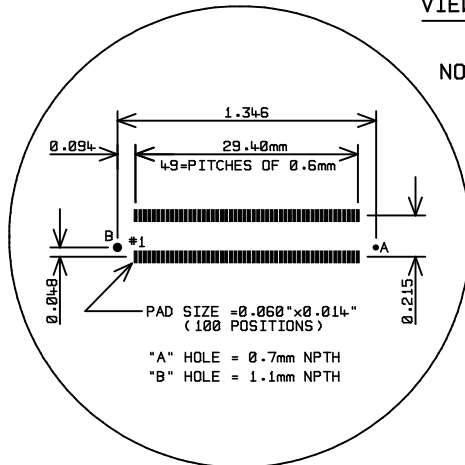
BOARD DIMENSIONS AND CONNECTOR POSITIONS
